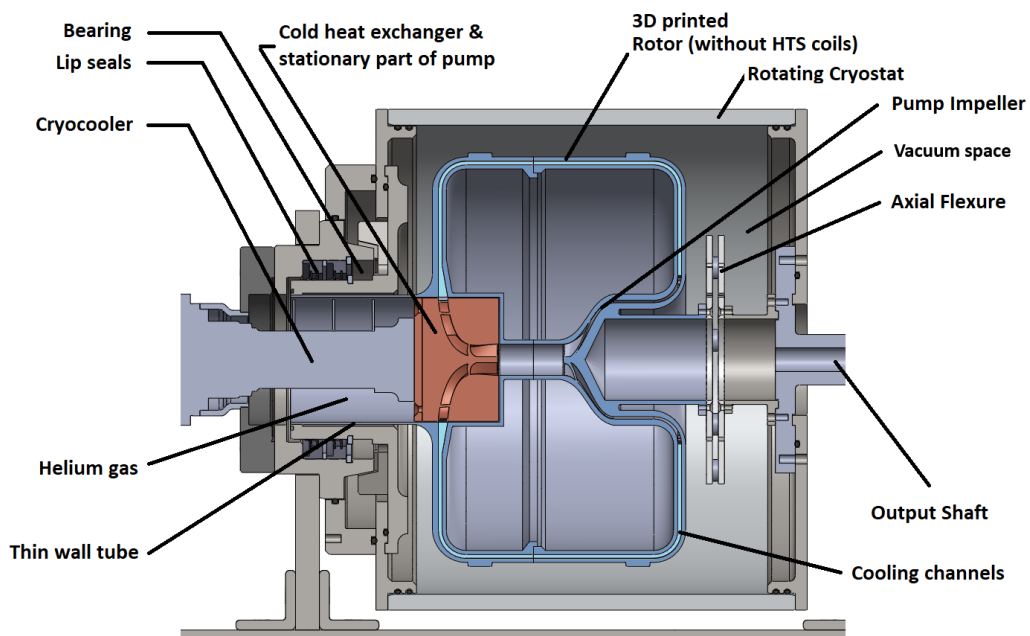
Layout of test rotor. The test rotor is a shortened version of the 100-kW rotor. The cryocooler is on the left and the drive output shaft on the right.
